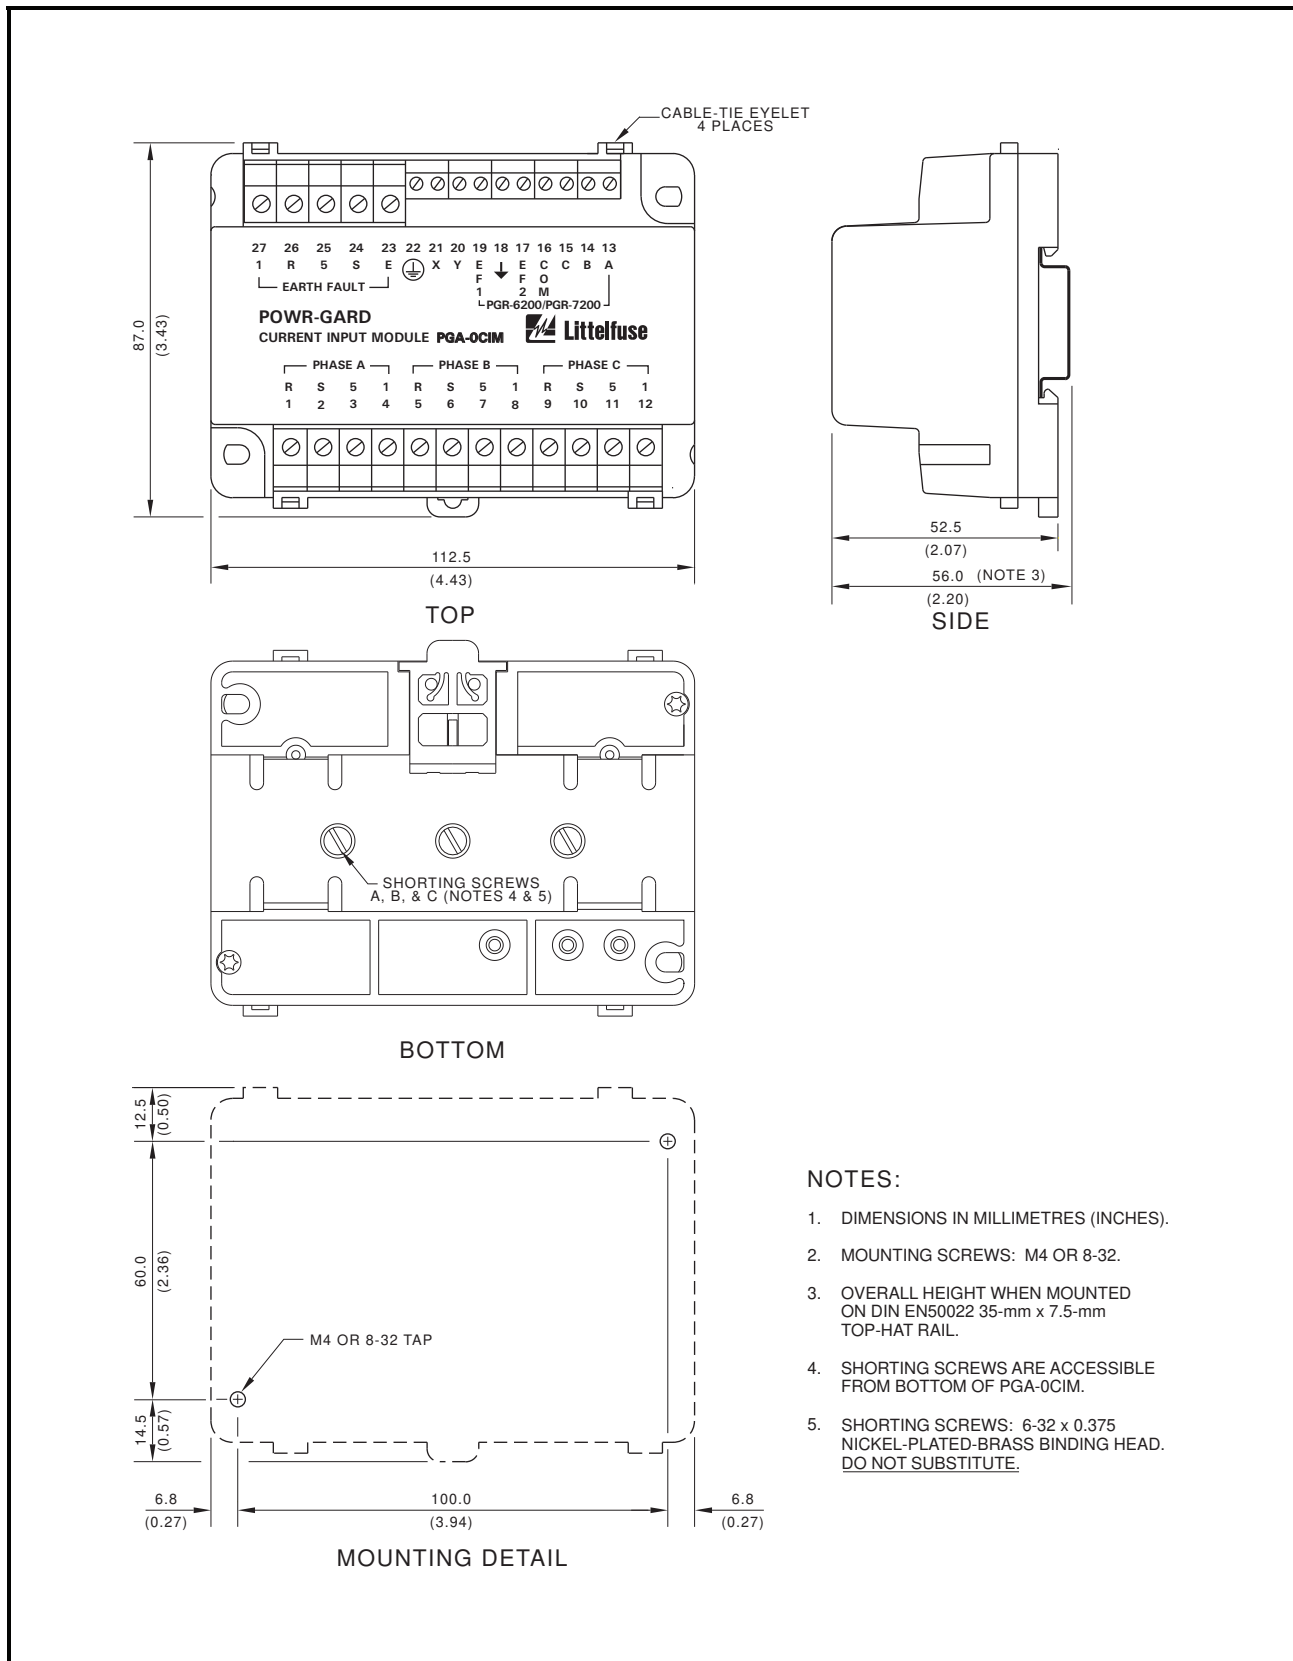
PGA-0CIM Outline and Mounting Details.
